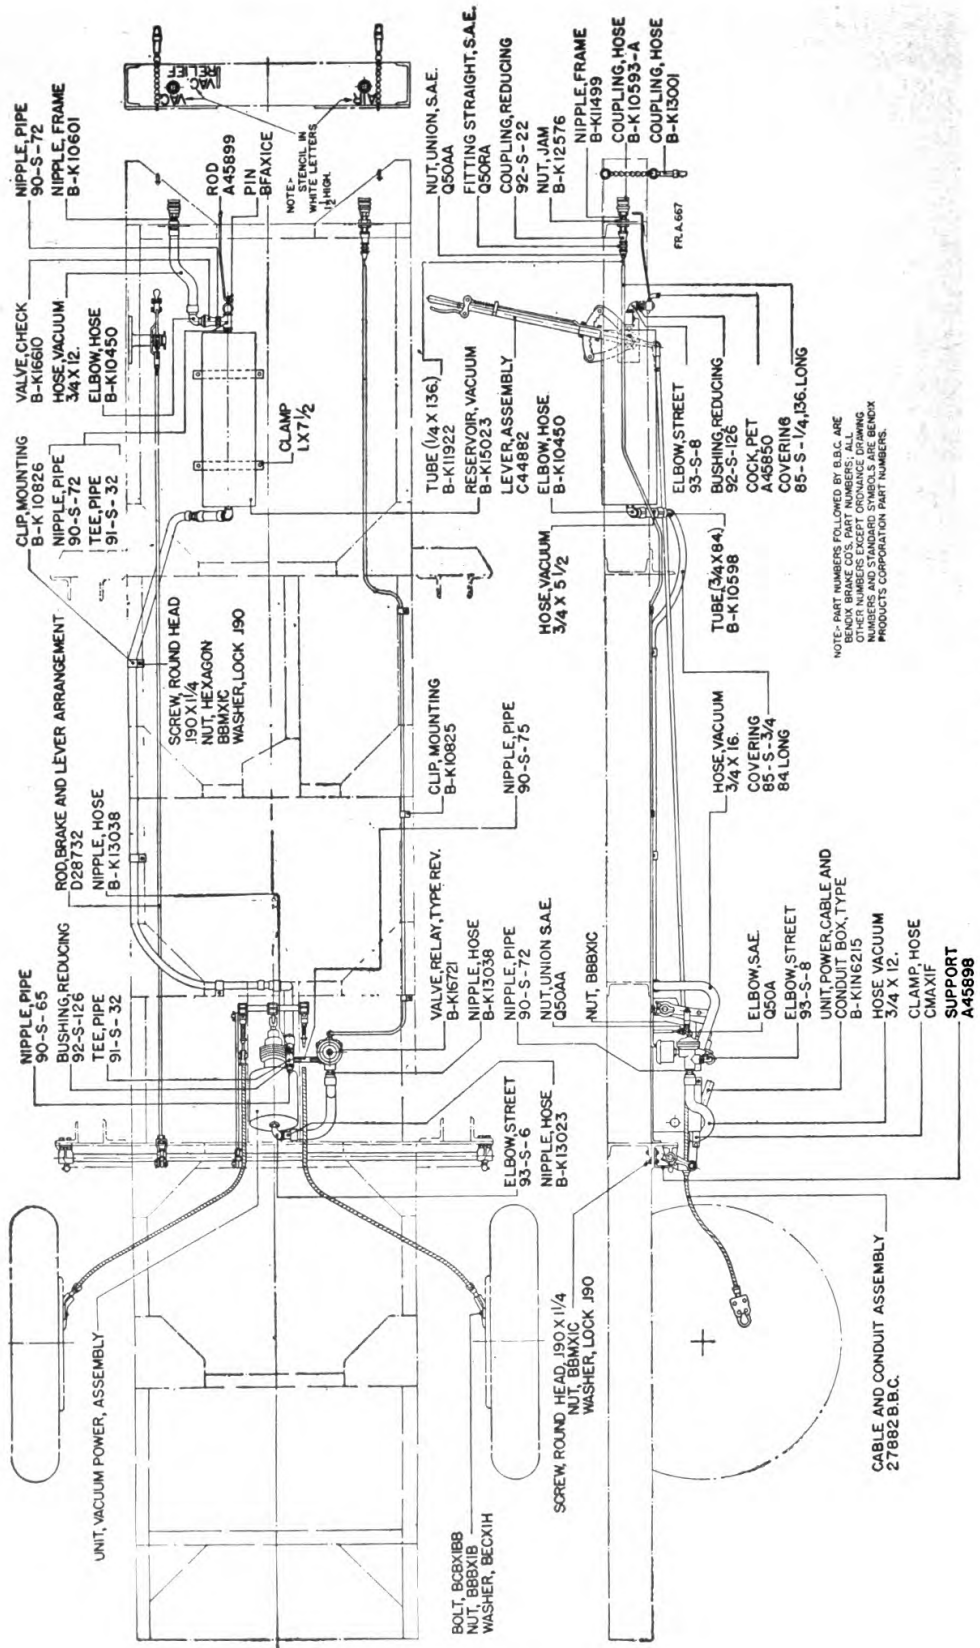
Sound locator trailer, M2A4—brake control.
